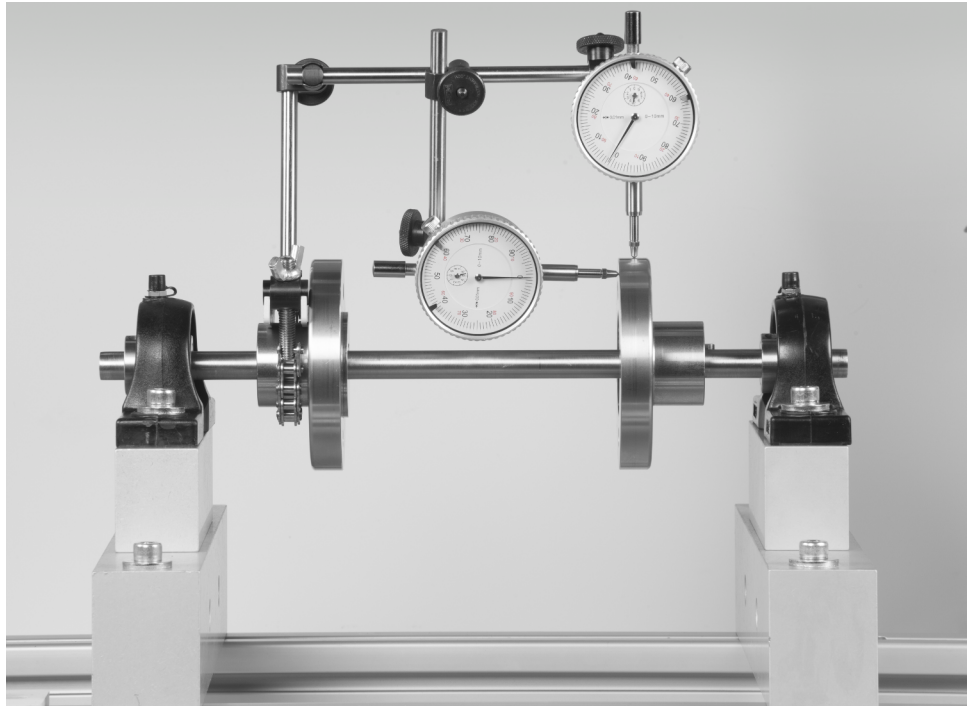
Dial indicator assembly installed on the coupling hub of the movable machine.
